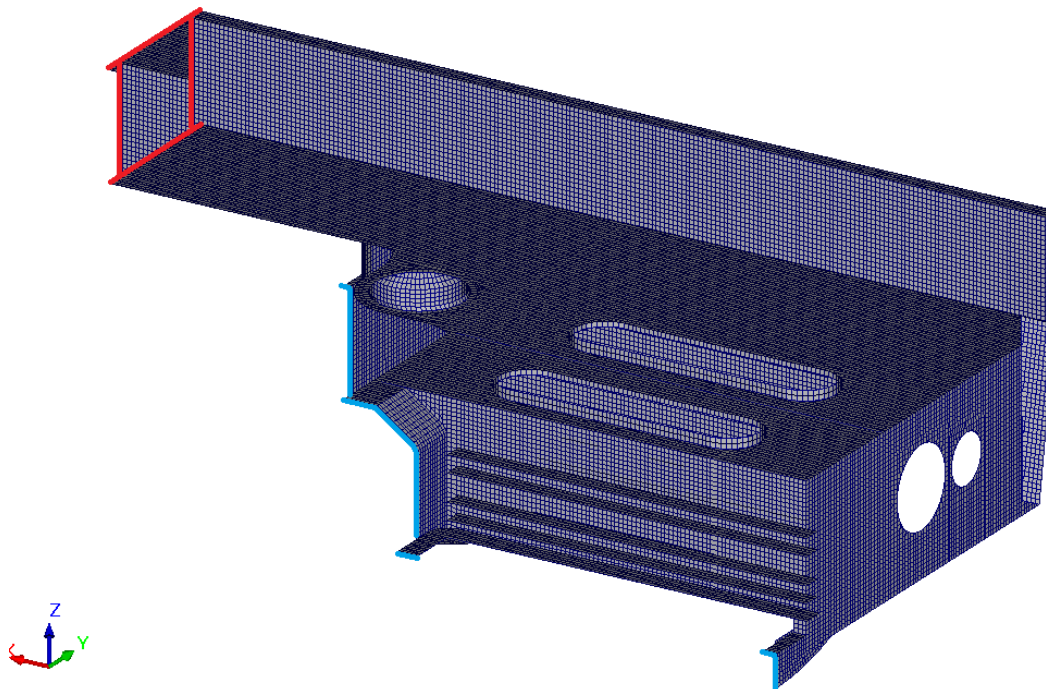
Strengthening of support zone with truss plates system in the buffer beam structure of PE2U traction unit.
